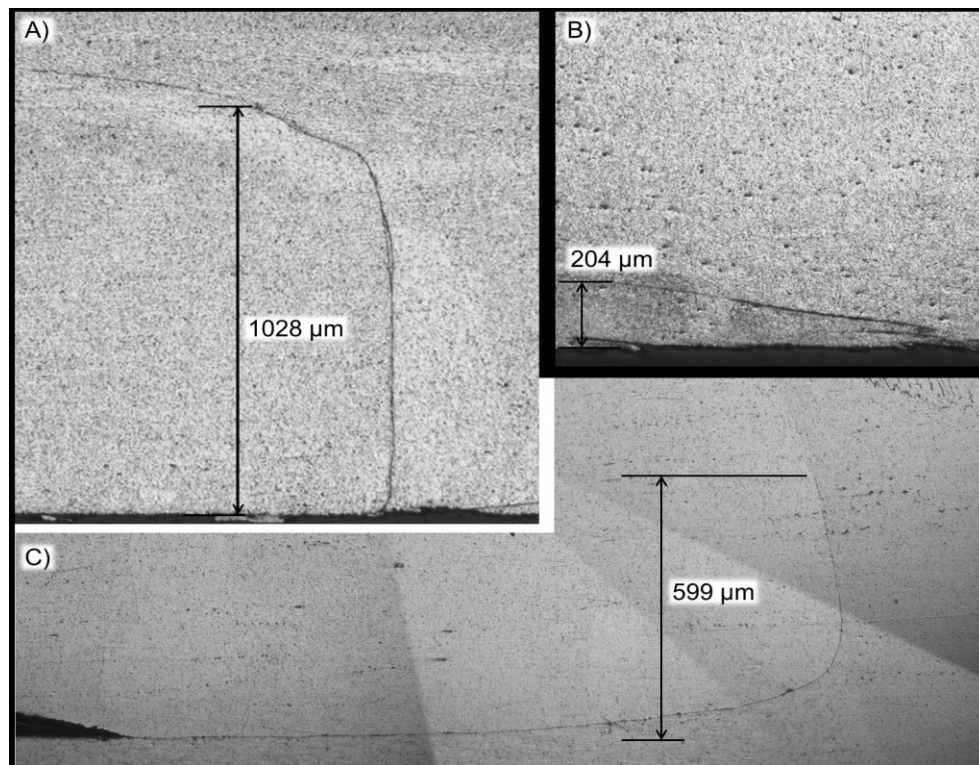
Weld root defect size measurements in (A) A6KB, (B) A6PW, and (C) A6LJ specimens
